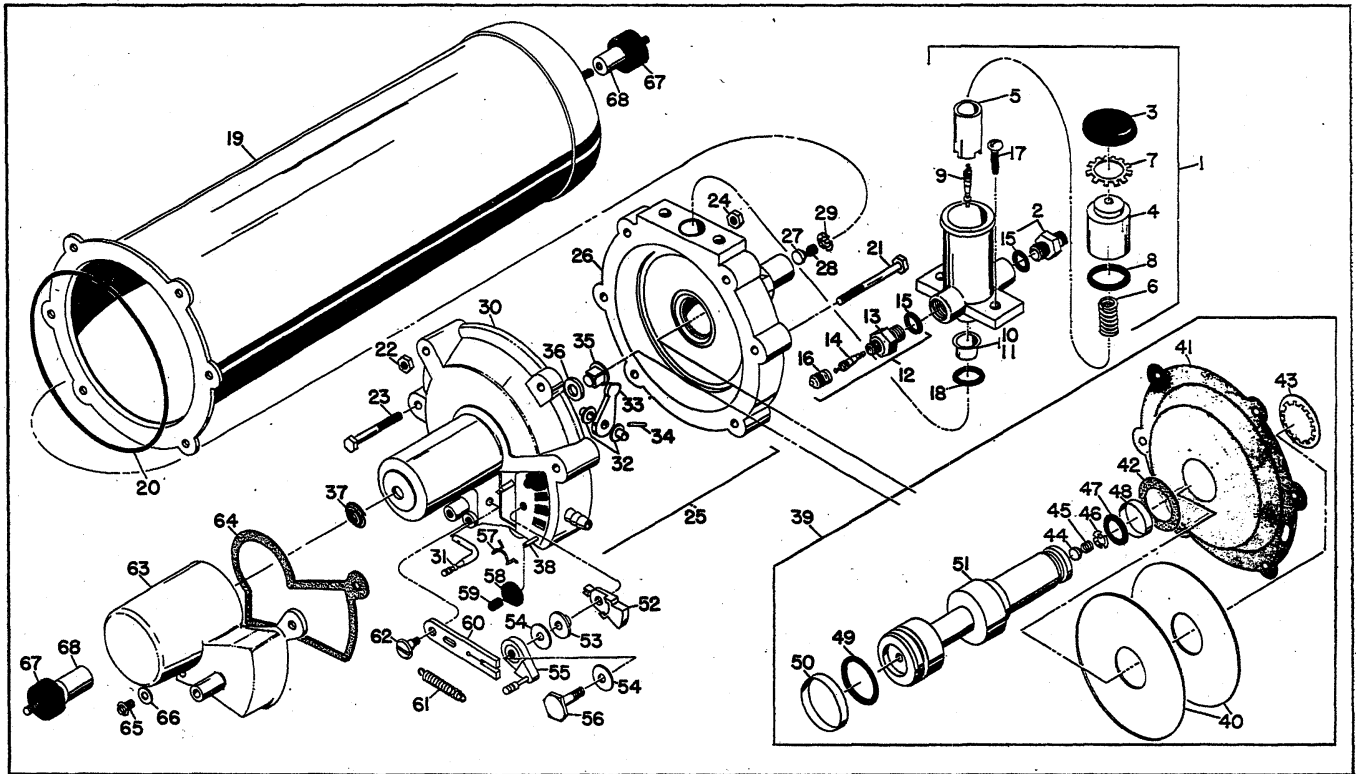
Compressor, Regulator and Reservoir - Exploded View
